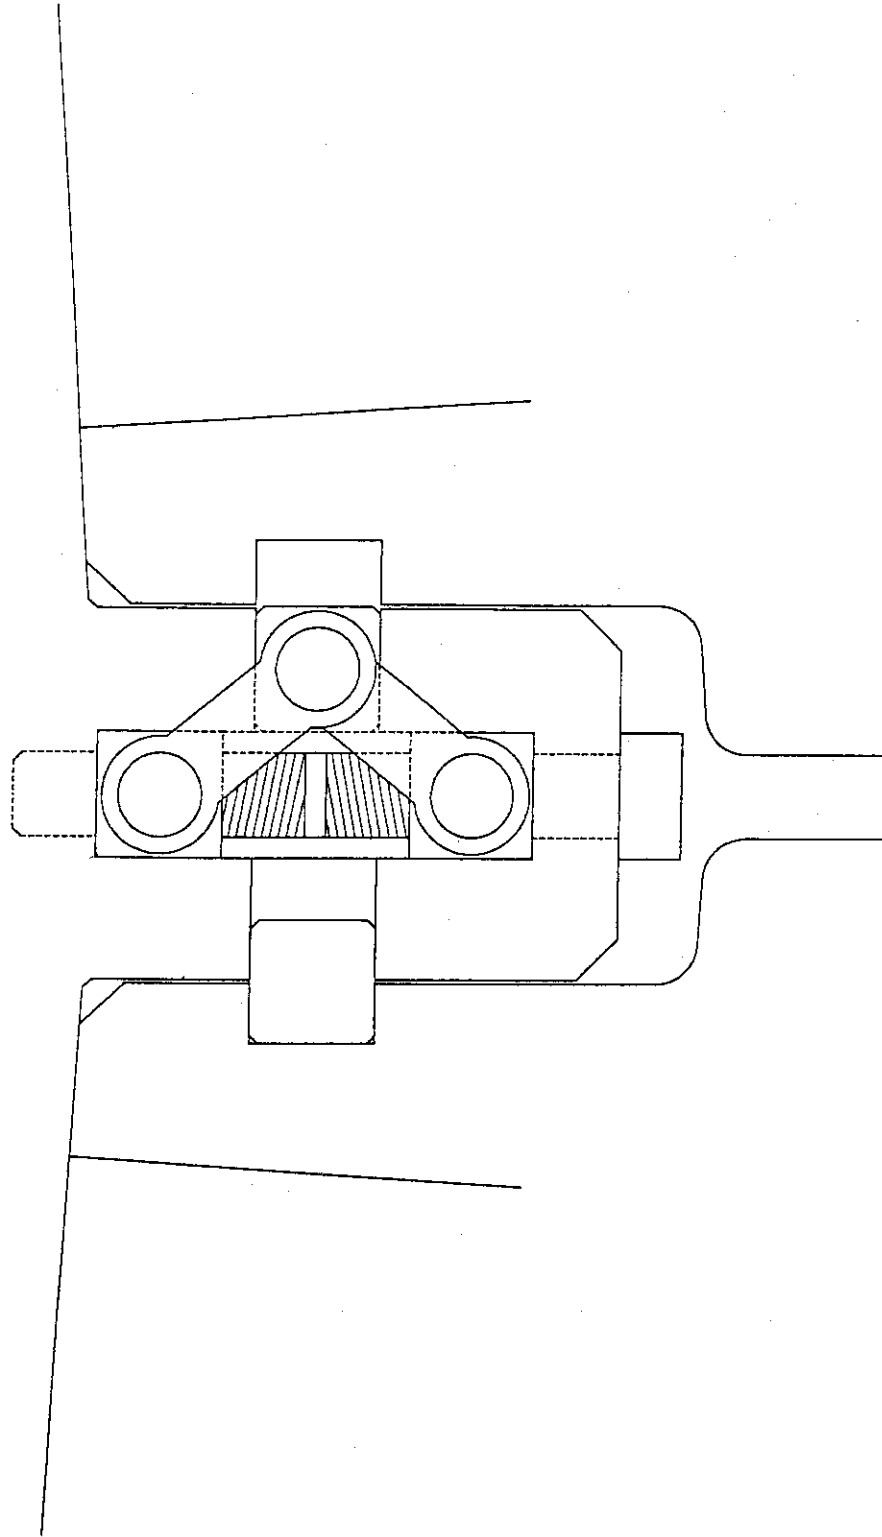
8 A zoomed up view of the key attaching lock and its driving mechanism composed of screw and links.
